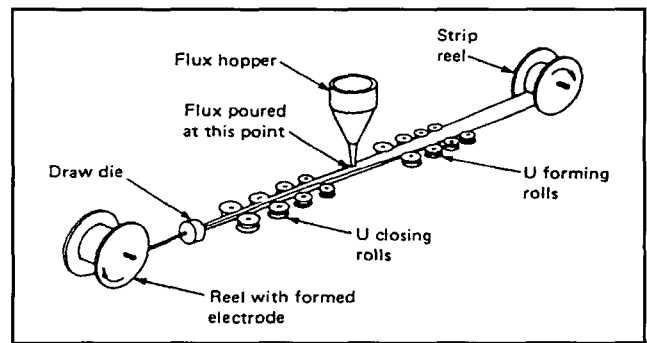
Schematic drawing of tubular wire manufacturing machine
